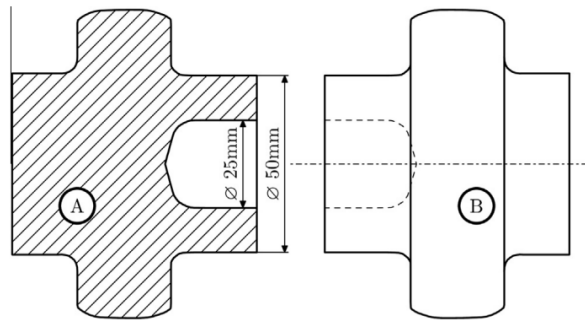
Direct drive friction weld of a hollow bar: Initial geometry [75]
